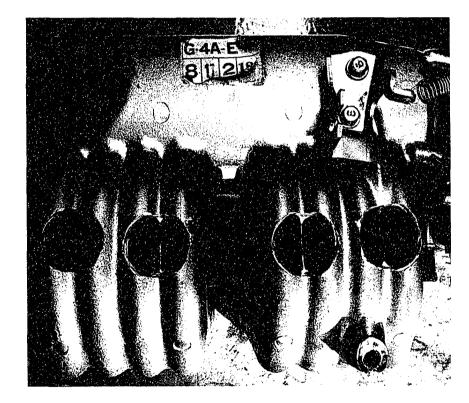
Modified Toyota Intake Manifold shown with Holes Drilled to Accommodate the manifold bridge.
